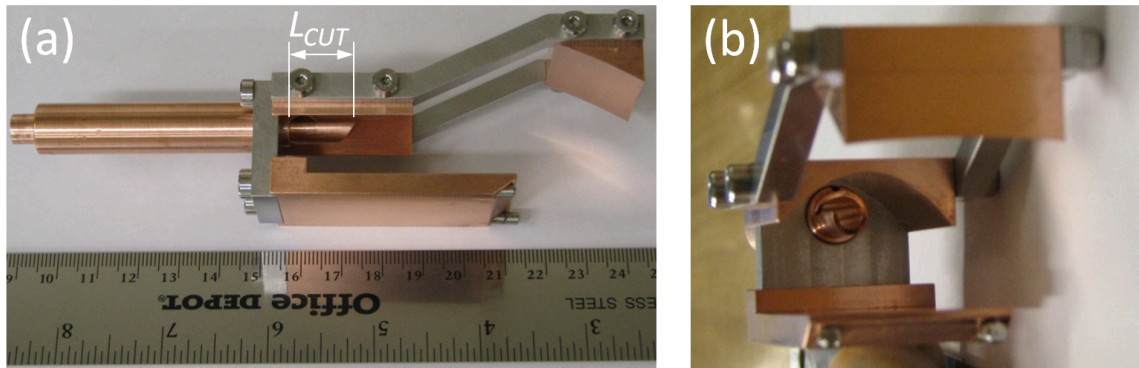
(a) Side view and (b) front view of the fabricated quasi-optical mode converter with a helical launcher.
